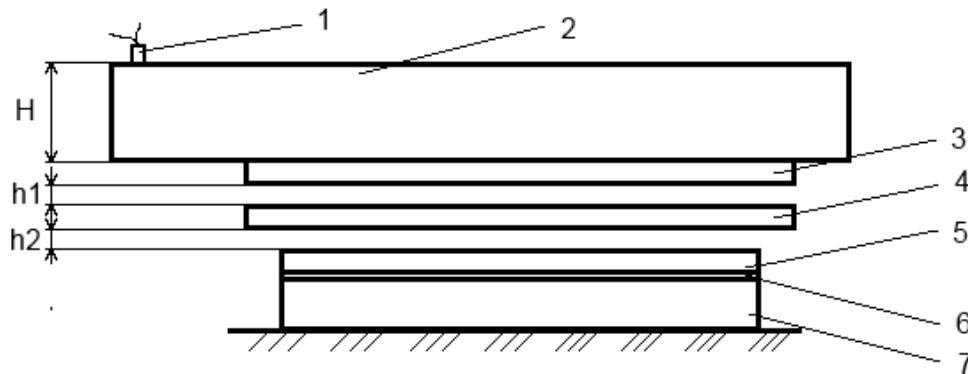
A three-layer material explosion welding scheme: 1 – electric detonator; 2 – HH charge; 3, 4 – thrown-off plates; 5 – fixed plate; 6 – a layer of an inert material; 7 – steel base; H –thickness of the HH charge;  $h_1$ ,  $h_2$  – technological gaps.
